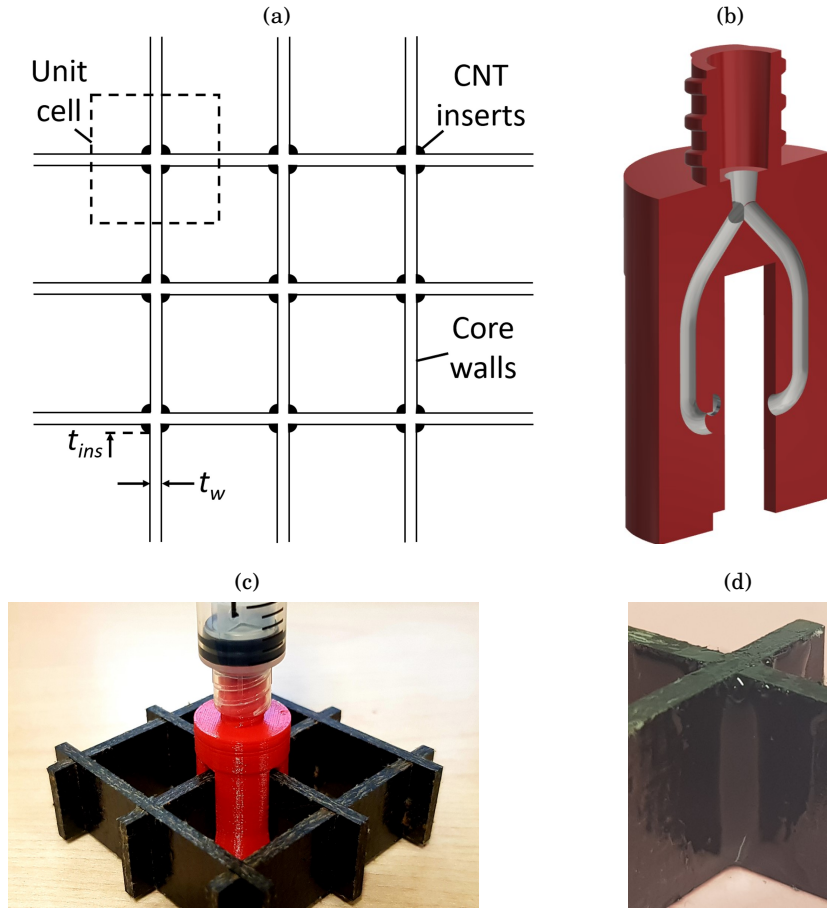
(a) Top-view representation of sandwich core with inserts and geometric characteristics. (b) CAD model of 3D-printed injection mould for CNT-resin deposition—AutoCAD 2017. (c) CNT-resin injection mechanism. (d) Example of viscoelastic insert at the core walls junction.
